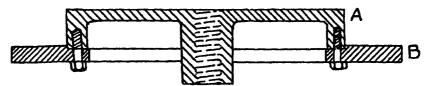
THE DISK WHEEL IS MADE IN TWO SECTIONS WHICH ARE HELD TO-GETHER WITH SCREWS
